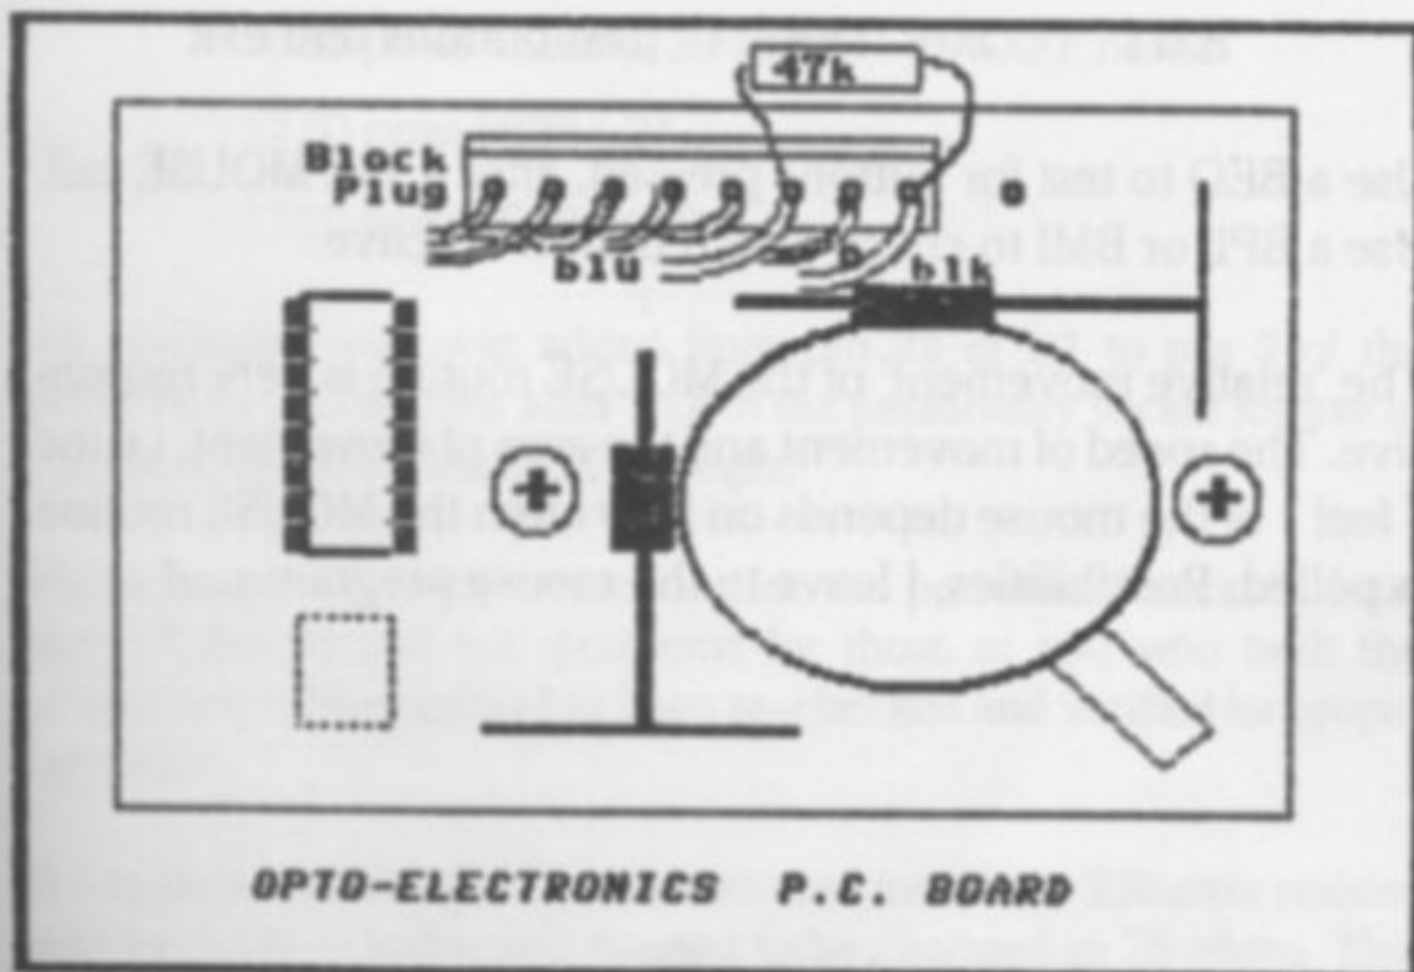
shows the layout of the p.c. board. The mouse cable plugs into a Block Plug on the board.
